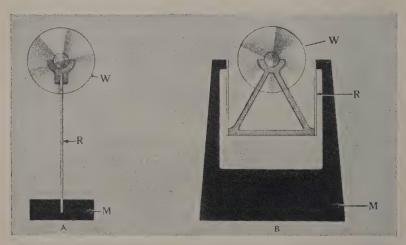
The principle and construction of a balancing machine workpiece supports.
